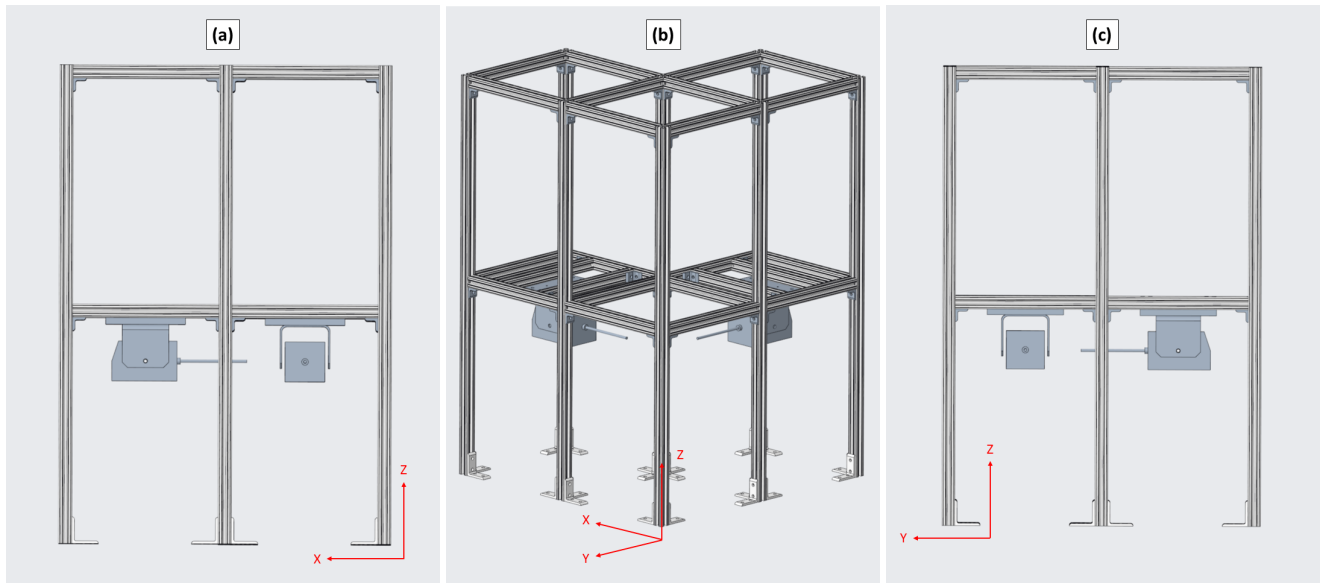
The CAD model for the undamped test stand configuration with the 45° gussets removed: (a) left view, (b) isometric view, (c) right view
